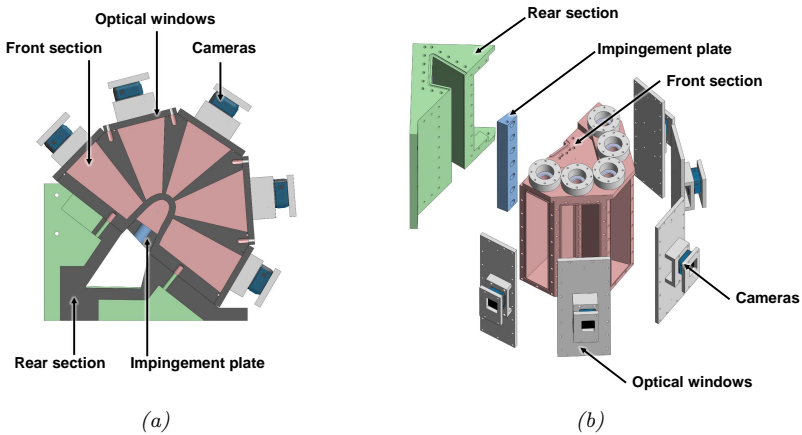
Cross-section (a) and exploded view (b) of the test article.
